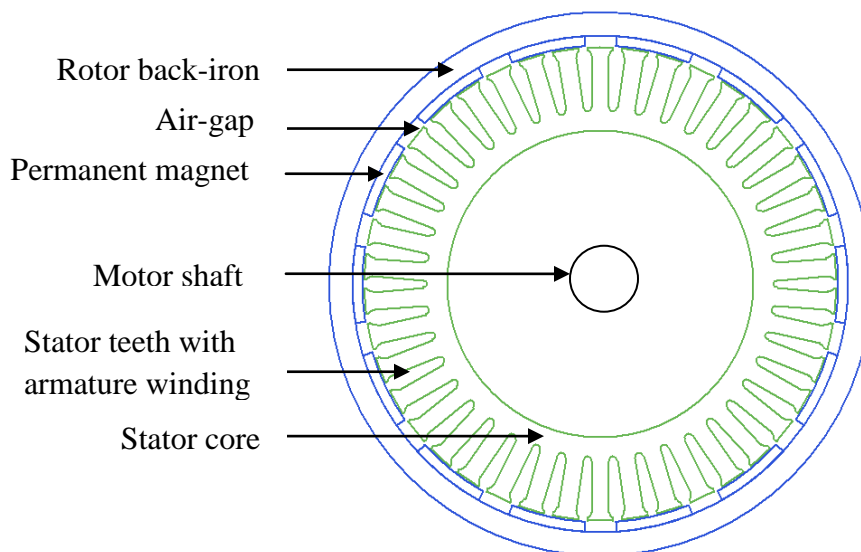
Schematic of a single-sided outer rotor slotted stator RFPM BL motor
